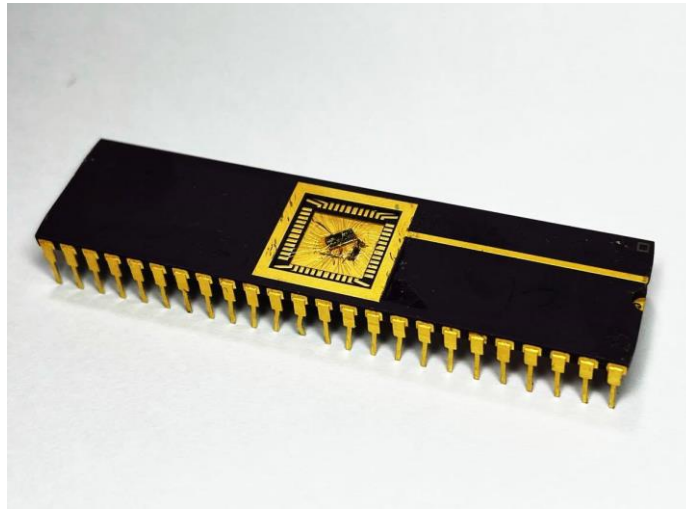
The CDM test chip has been assembled in a Ceramic side-braze 48 pins (SB-48) package with the interconnection of bonding wires.
